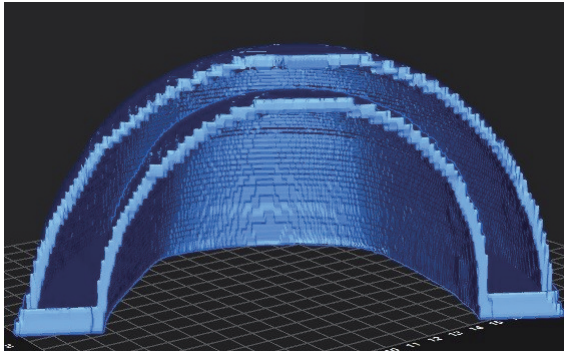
STL file made of 0.5 cm outer wall 2 cm inner wall
